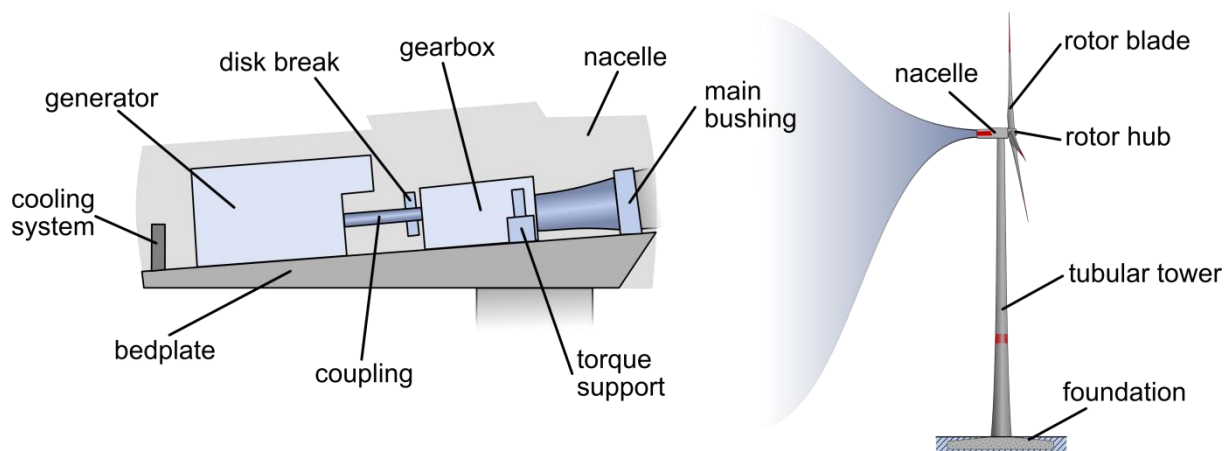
The general design of a wind turbine drivetrain with a multi-stage gear
